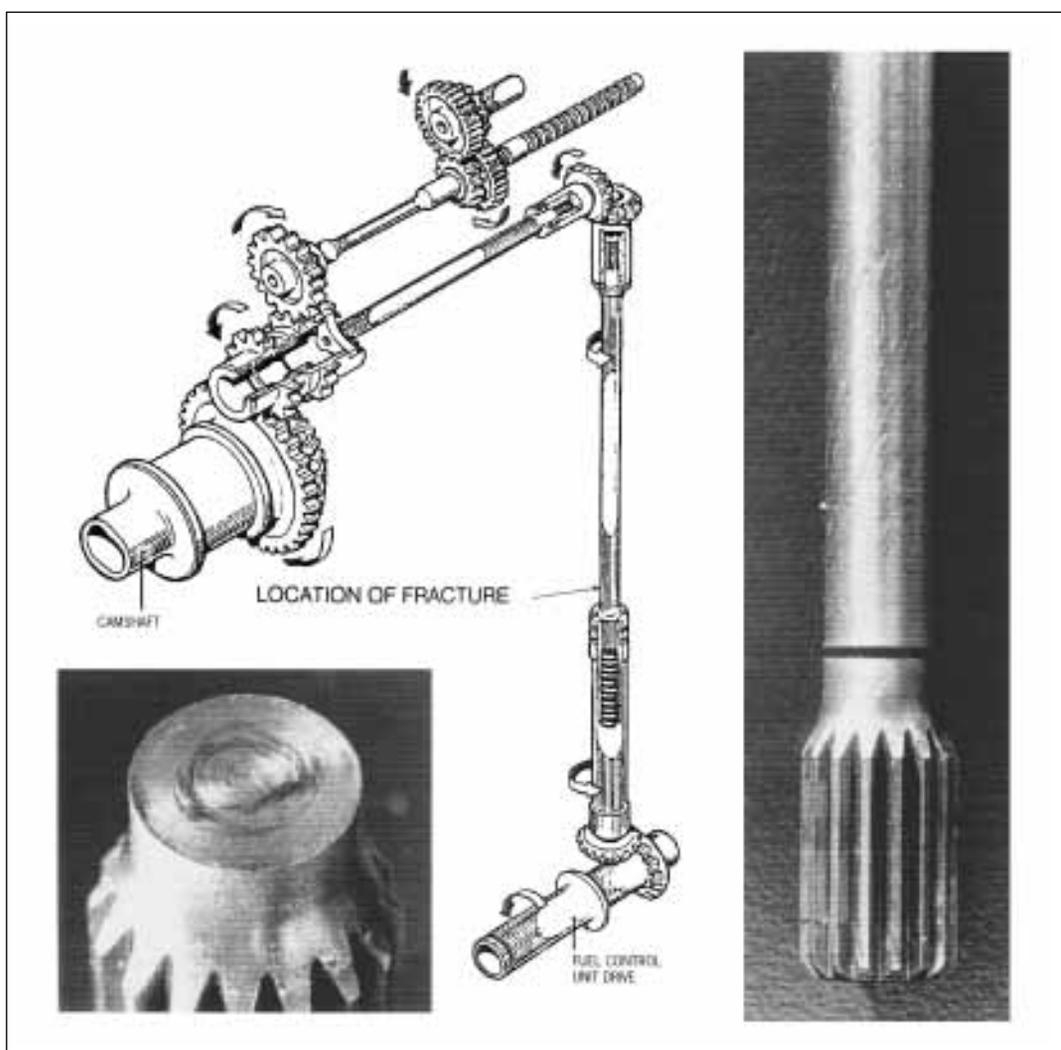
Views of the fractured vertical drive shaft showing the location of the fracture and the fracture surface. The schematic shows the relationship of the drive shaft with the engine camshaft and fuel control unit drive.
